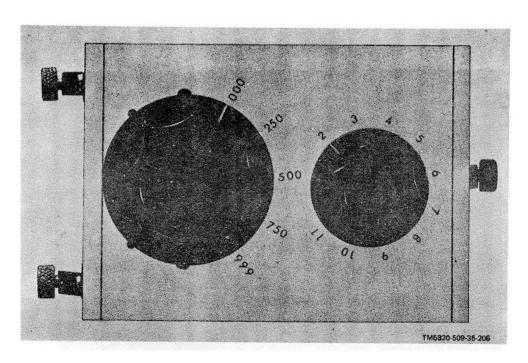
Indexing Fixture for CV 1377A/PRC, Suggested Layout.
